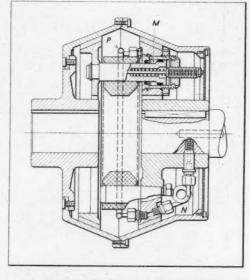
Sectional drawing of an Elsi-Hydrostar flexible and slipping coupling which can be declutched hydraulically
